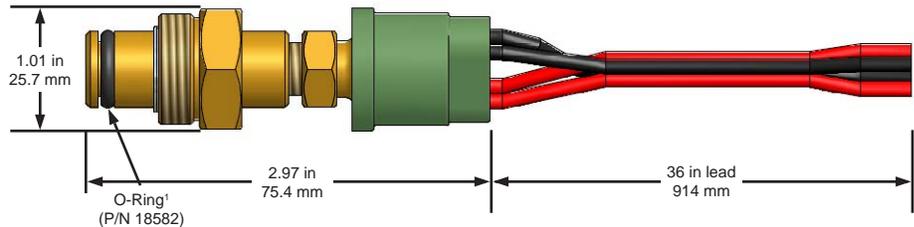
Mv and Lv Series Low-Pressure Supervisory Switch Assembly
